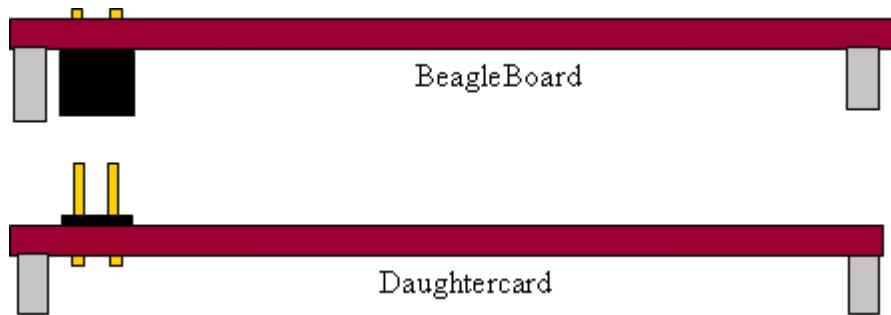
BeagleBoard Bottom Stacked Daughter Card
